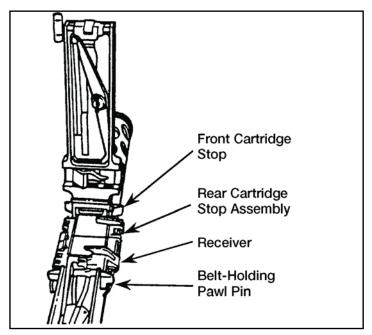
Removal of the cartridge stop assemblies
